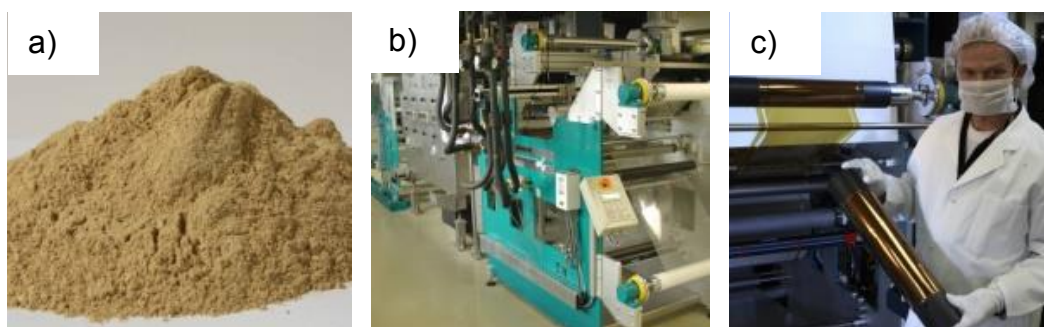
Membrane fabrication: a) m-PBI powder, b) casting machine and c) final membrane. Pictures were provided by elcomax GmbH.
